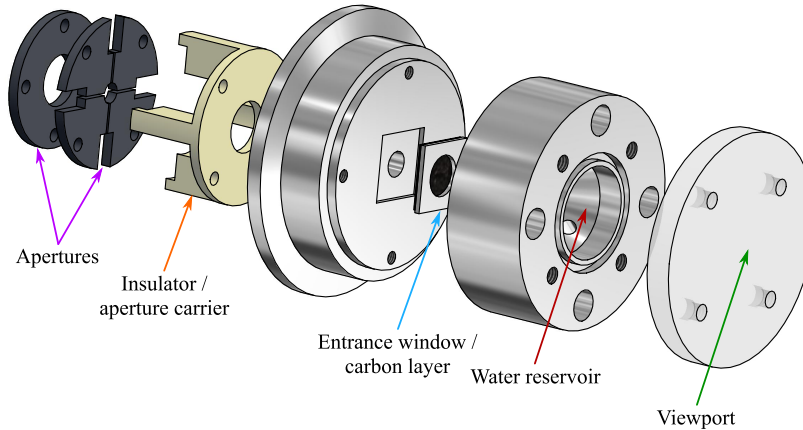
Exploded assembly drawing of the aperture system which contains the four-segmented measurable aperture facing towards the beam line.
